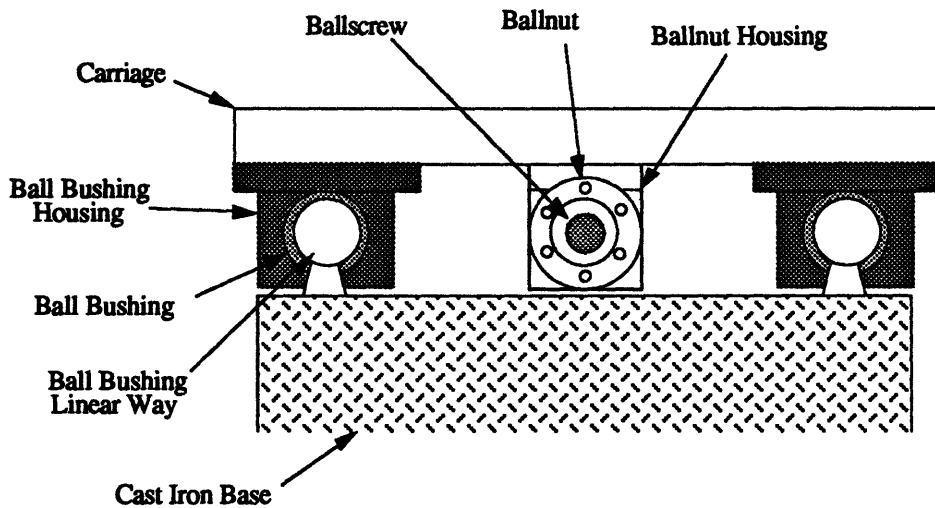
End-view of the Experimental Machine-Tool Axis.
